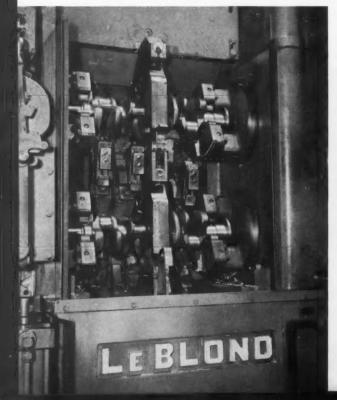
View of tooling area on doublespindle lathe seen in Fig. 5. Sixteen tool bits rough-face counterweight cheeks and rough-turn the pin bearing surfaces.
